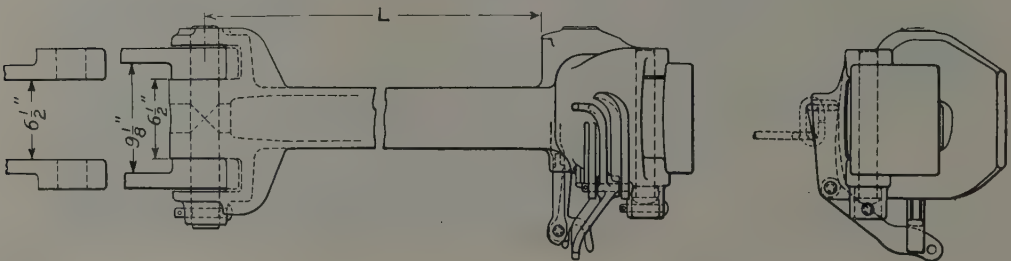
Cast Steel Extended Shank and Yoke Connection for Quadruple Shear Pivot Pin.
